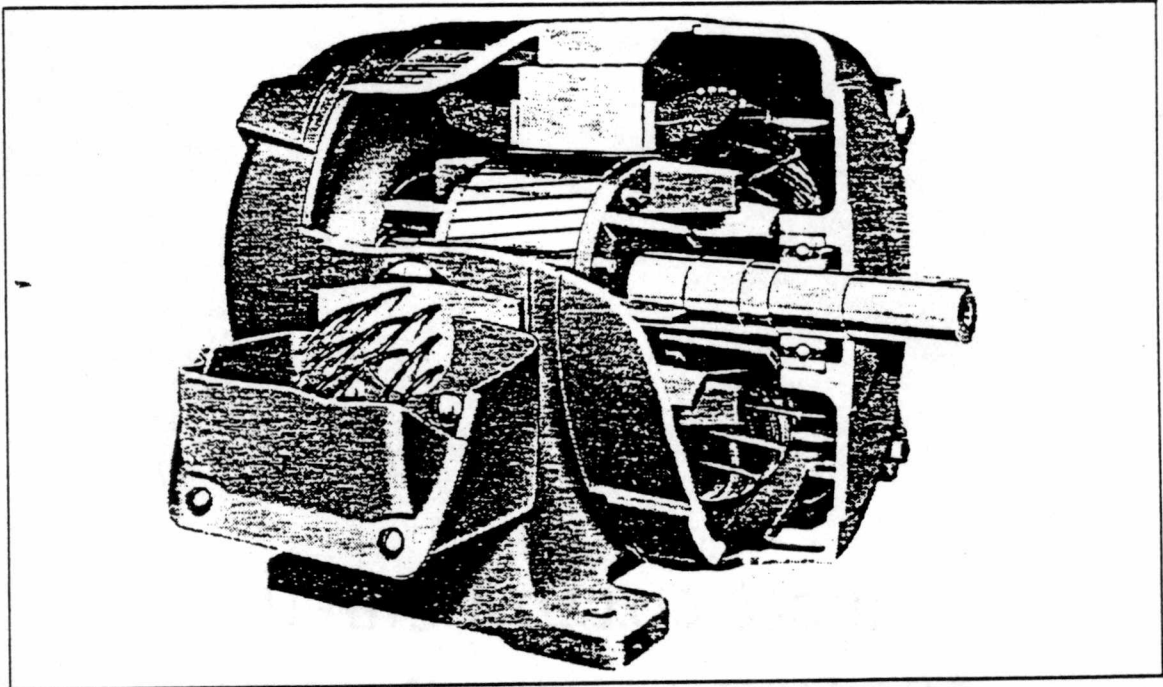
Cutaway View of a Squirrel Cage Rotor [2]
